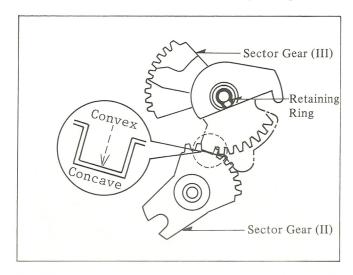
Assembly and Adjustment of Gears and Rods-(2)
